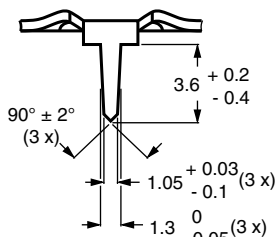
Mounting hole diagram and outline. Form MR: With mounting ring and pins
